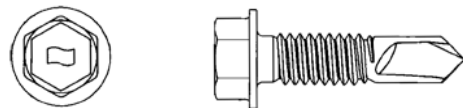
#12-24 INDENTED HEX WASHER HEAD TYPE 7 SCREW
